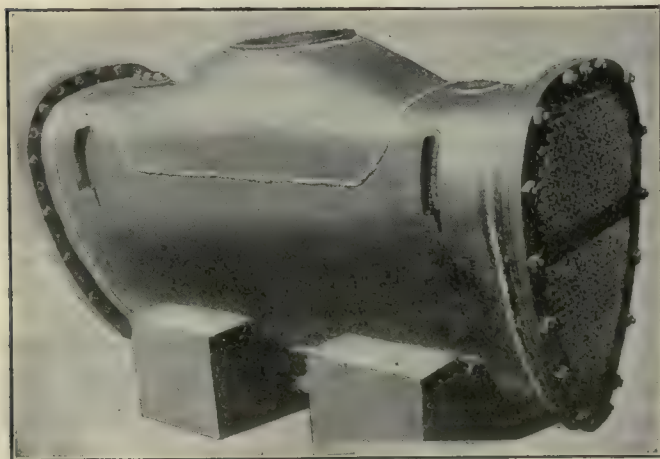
WELDED STEEL-PLATE CONDENSER. NO RIVETS IN ITS CONSTRUCTION. SIZE 4 X 7 FT.
